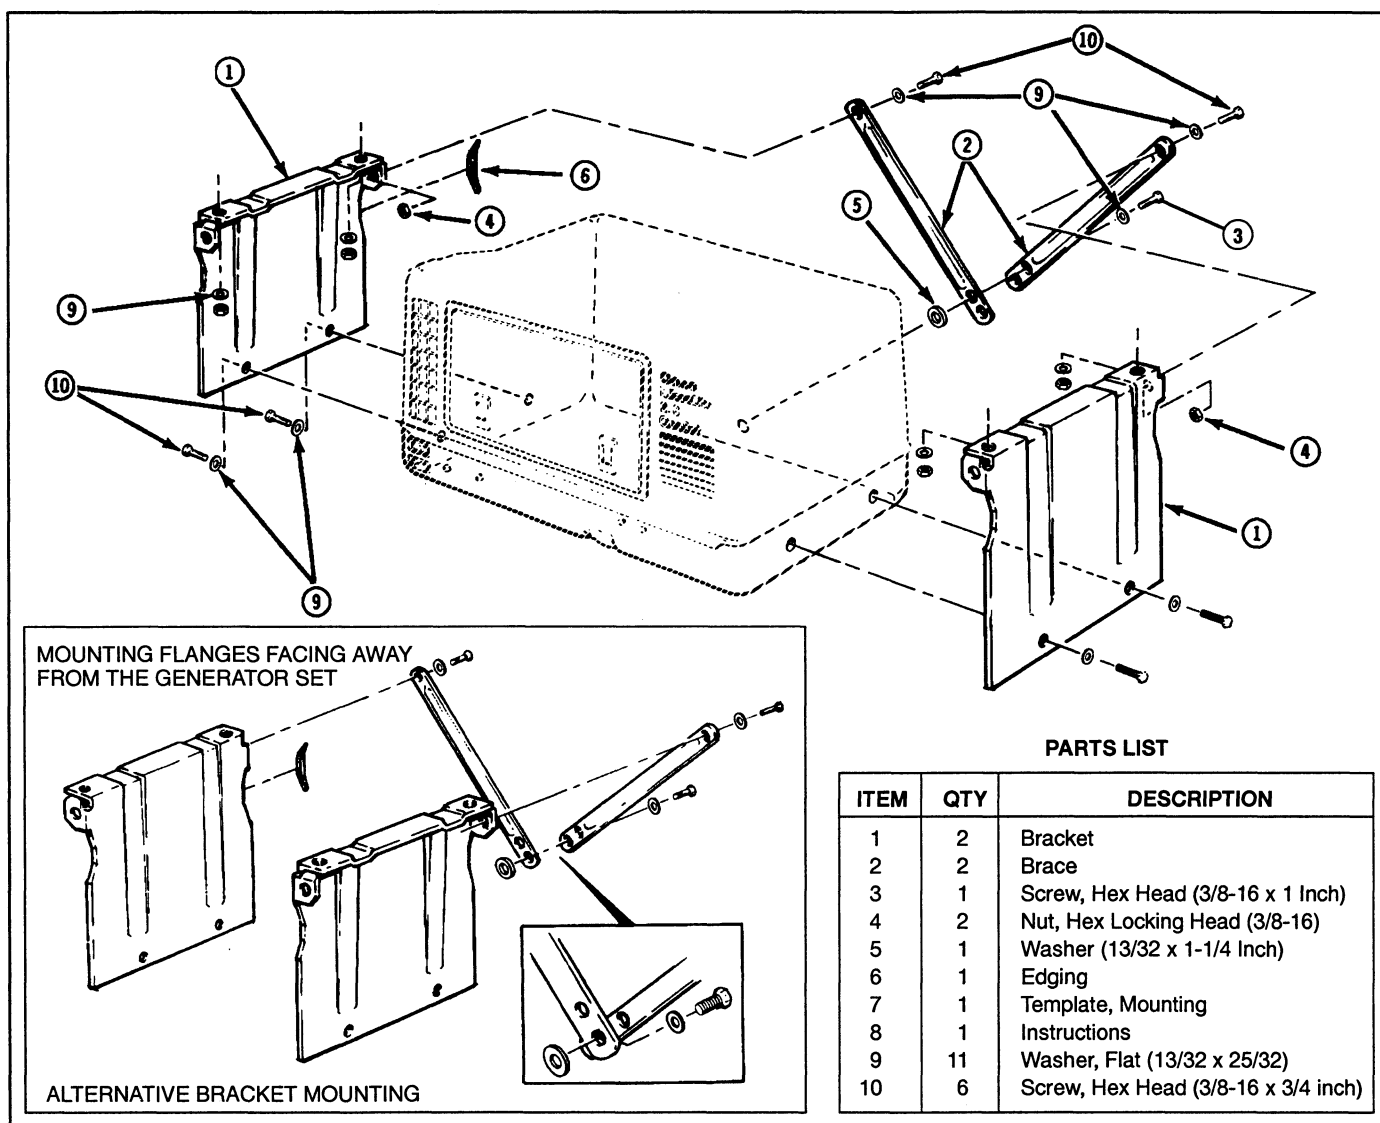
KV UNDER-FLOOR HOUSING (KIT 403-2689)
